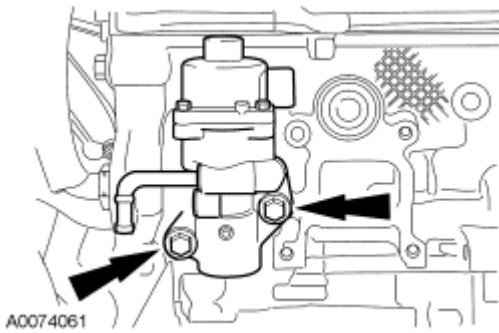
Locating Exhaust Gas Recirculation Valve And Bolts
